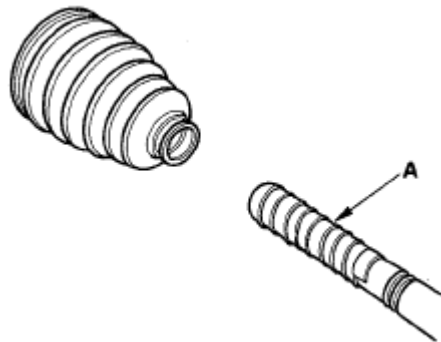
Wrapping Splines On Driveshaft With Vinyl Tape
